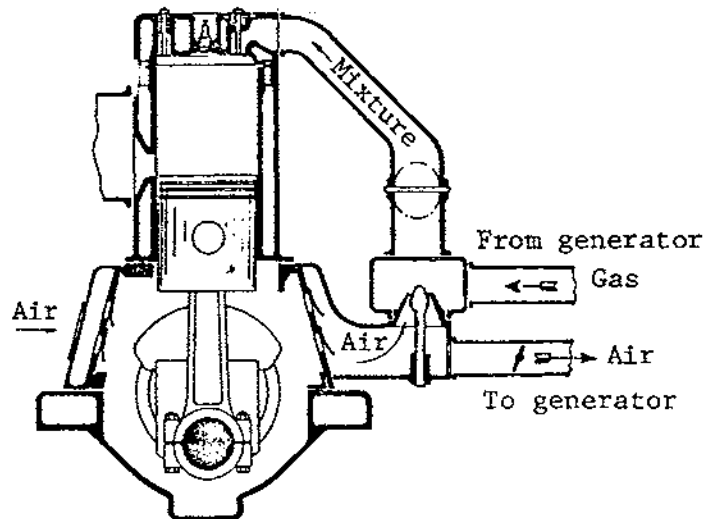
Bolinder-Munktell's Two-cycle Tractor Engine, Type W7, for Generator Gas Operation (Automatic valves in the engine, overpressure in the generator).
